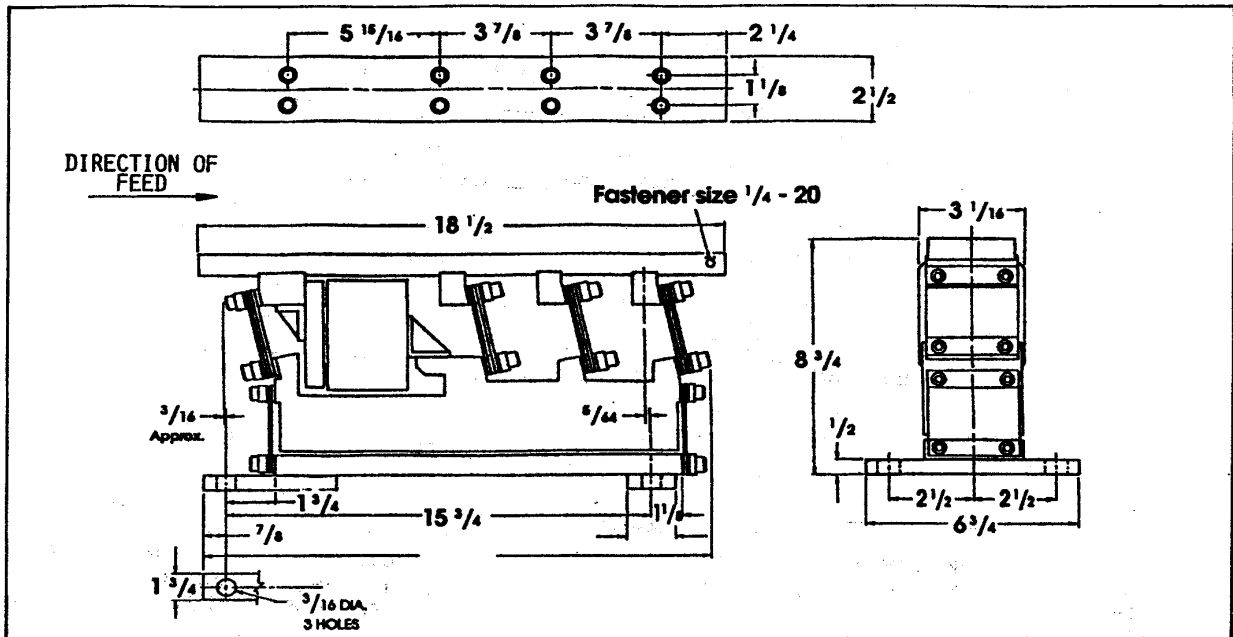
LD-12 OUTLINE DIMENSIONS
